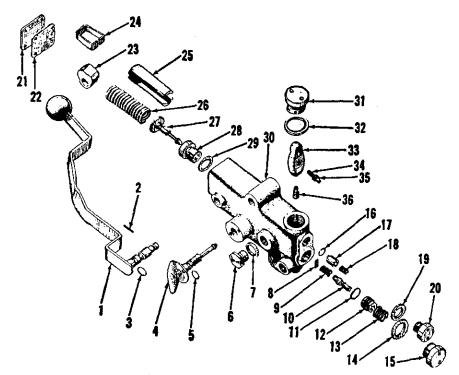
Exploded view of the B-275 series hydraulic control valve. A remote coupling attachment may be installed instead of plug (6).
